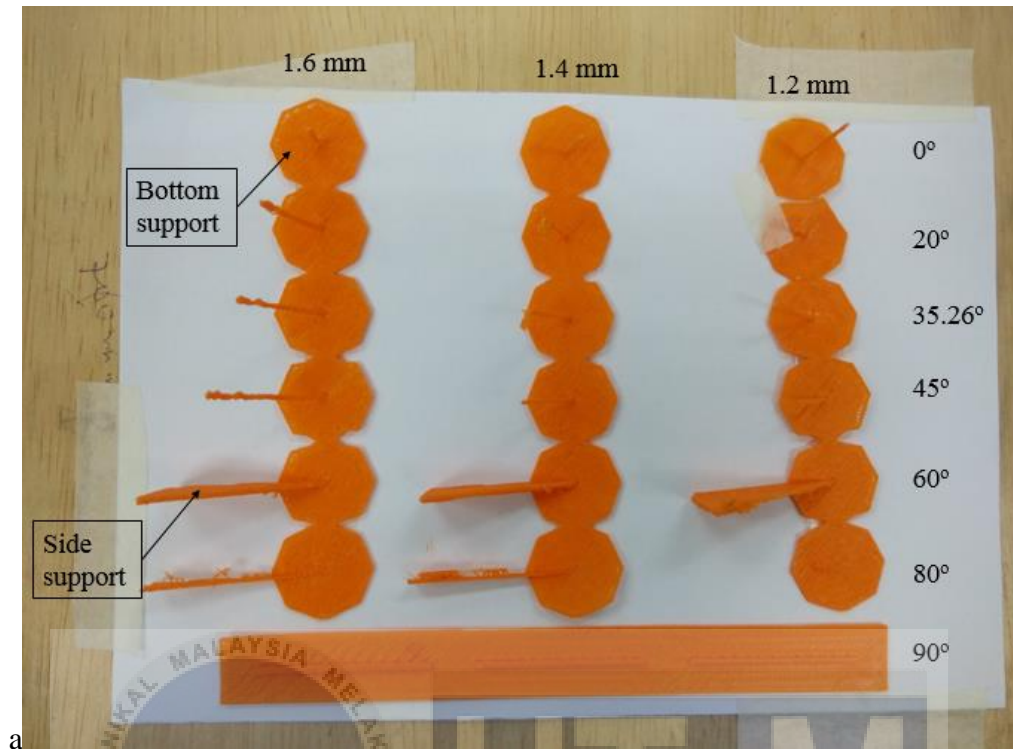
Top view for printed single struts using CubePro 3D printer.
